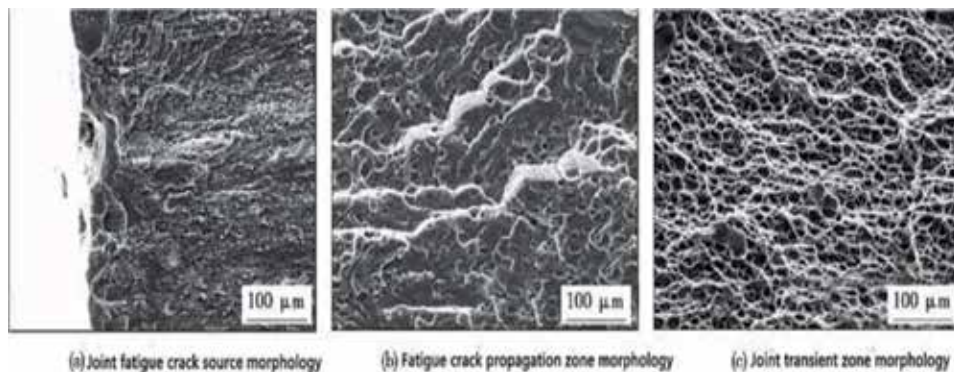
Fatigue crack propagation in 6005 friction welded joints [7].
